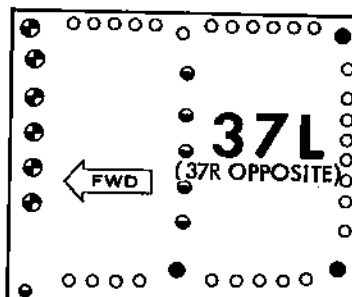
External Access Door Fastener Patterns (Sheet 1 of 7)
